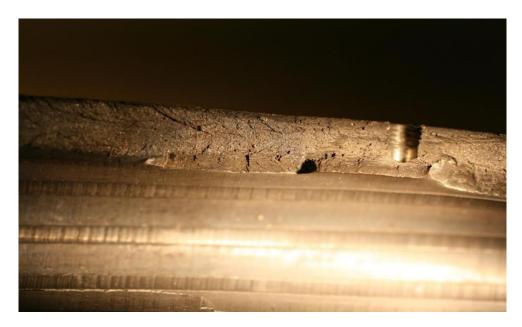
Chevron markings can be seen here as they point towards the origin of the fracture i.e. the mounting hole.
